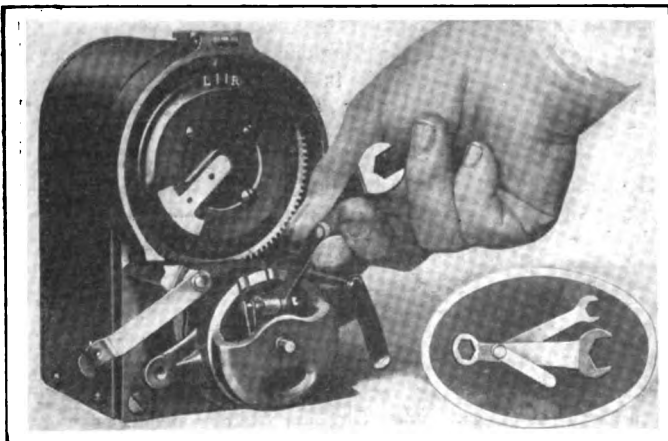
Adjusting the breaker gap. A special wrench is furnished for this purpose
